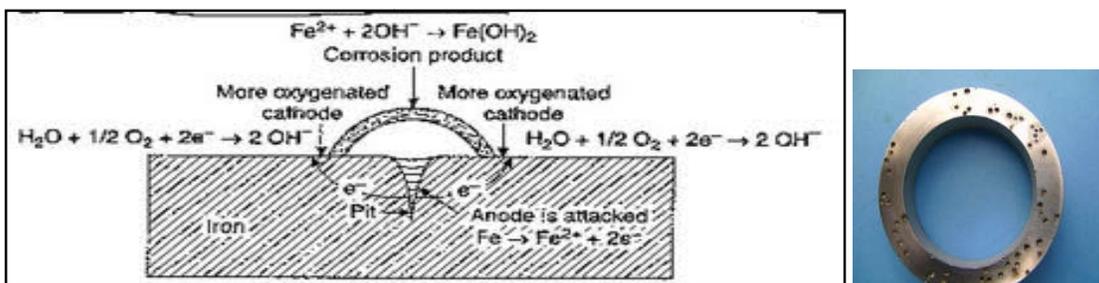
The mechanism and image of pitting corrosion.
